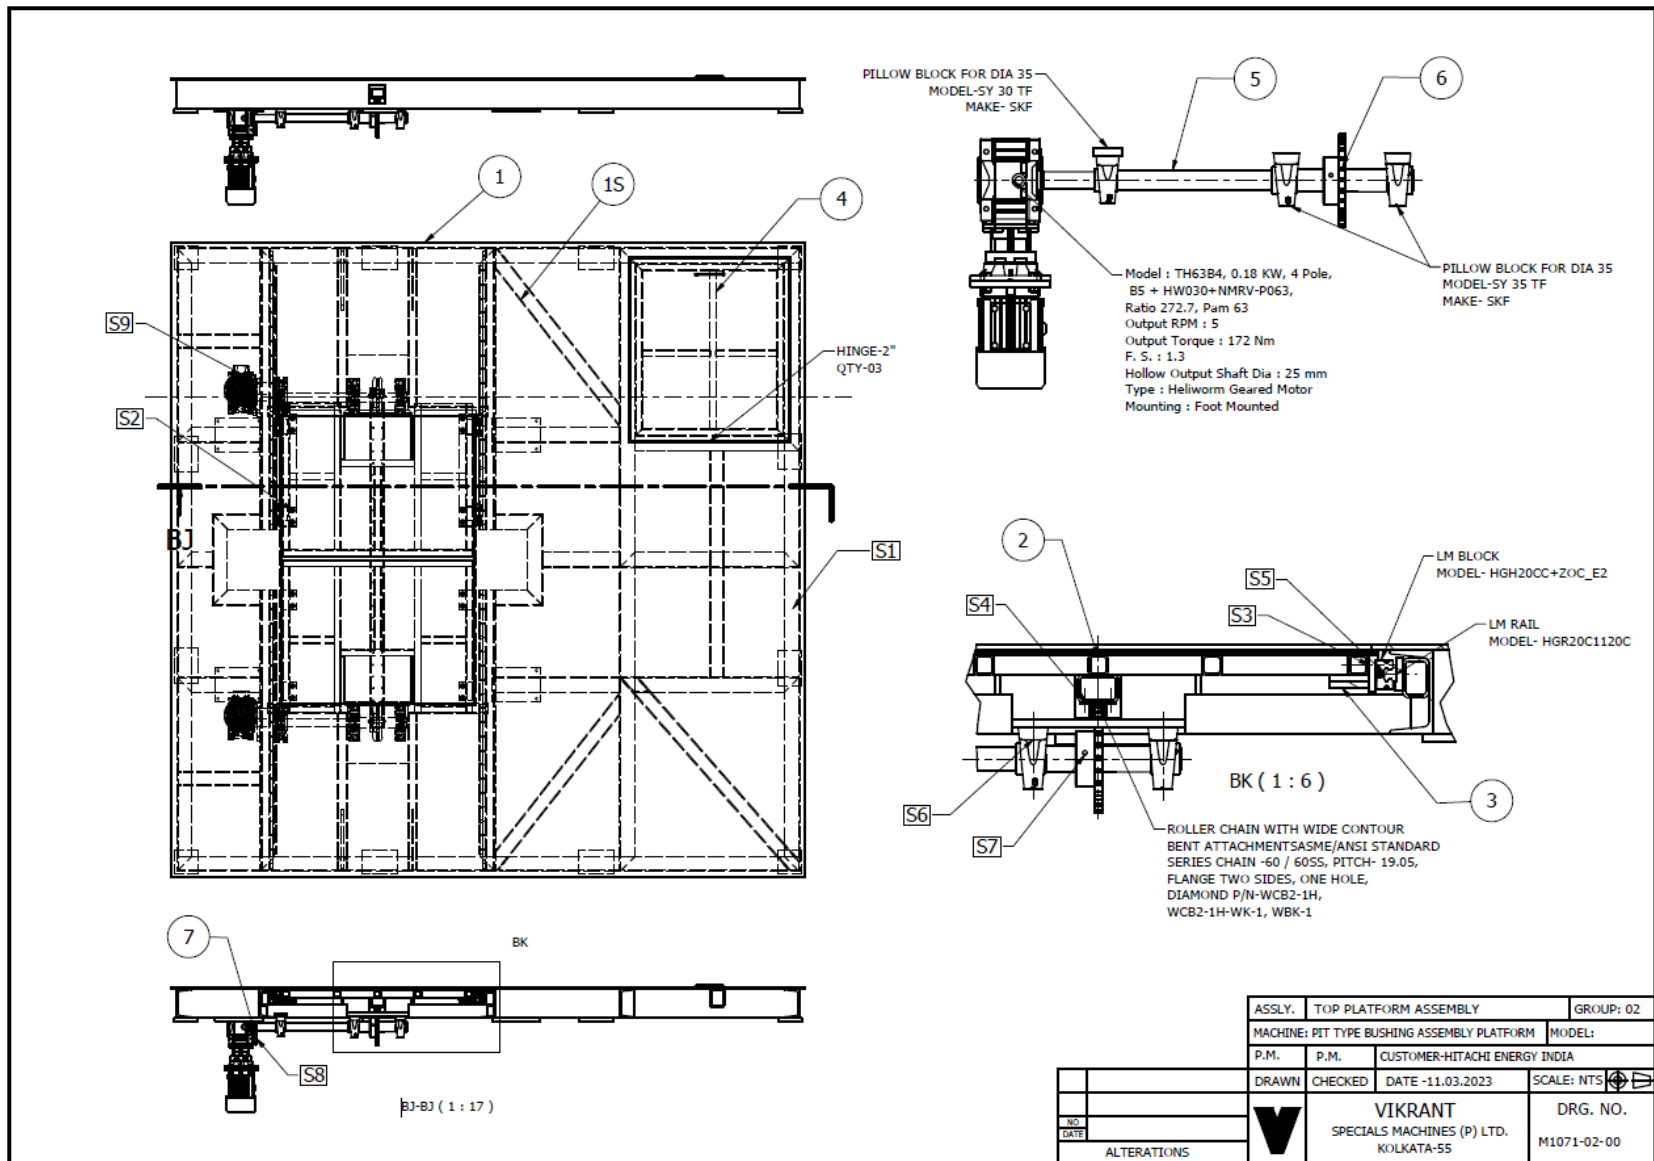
(g) Assembly drawing Top Platform Assembly
